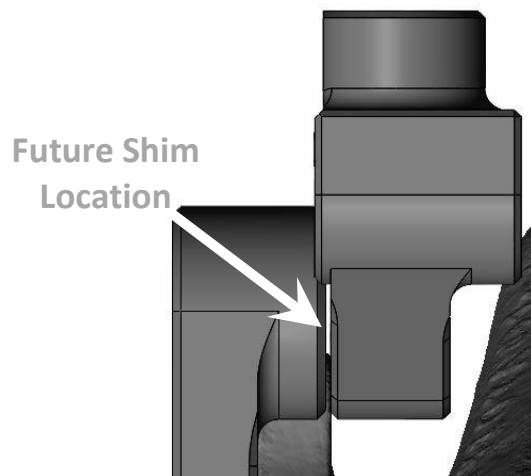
Shim Location (Use For Future Caliper Shimming Process)
